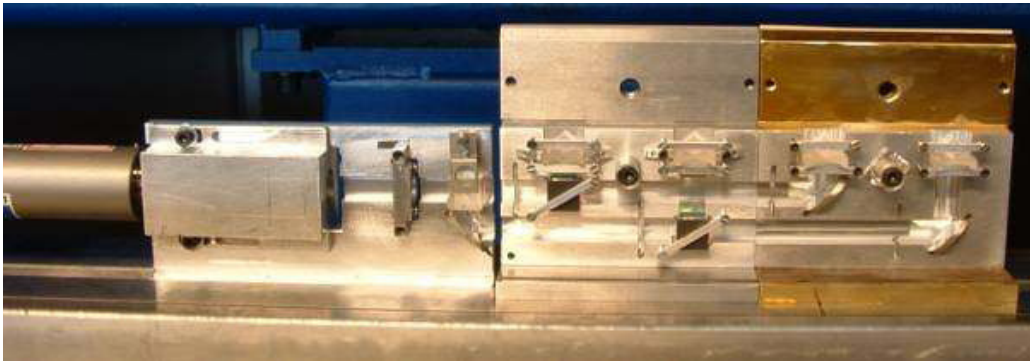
Assembly of a beam-splitter-solution in the lower bending tool
